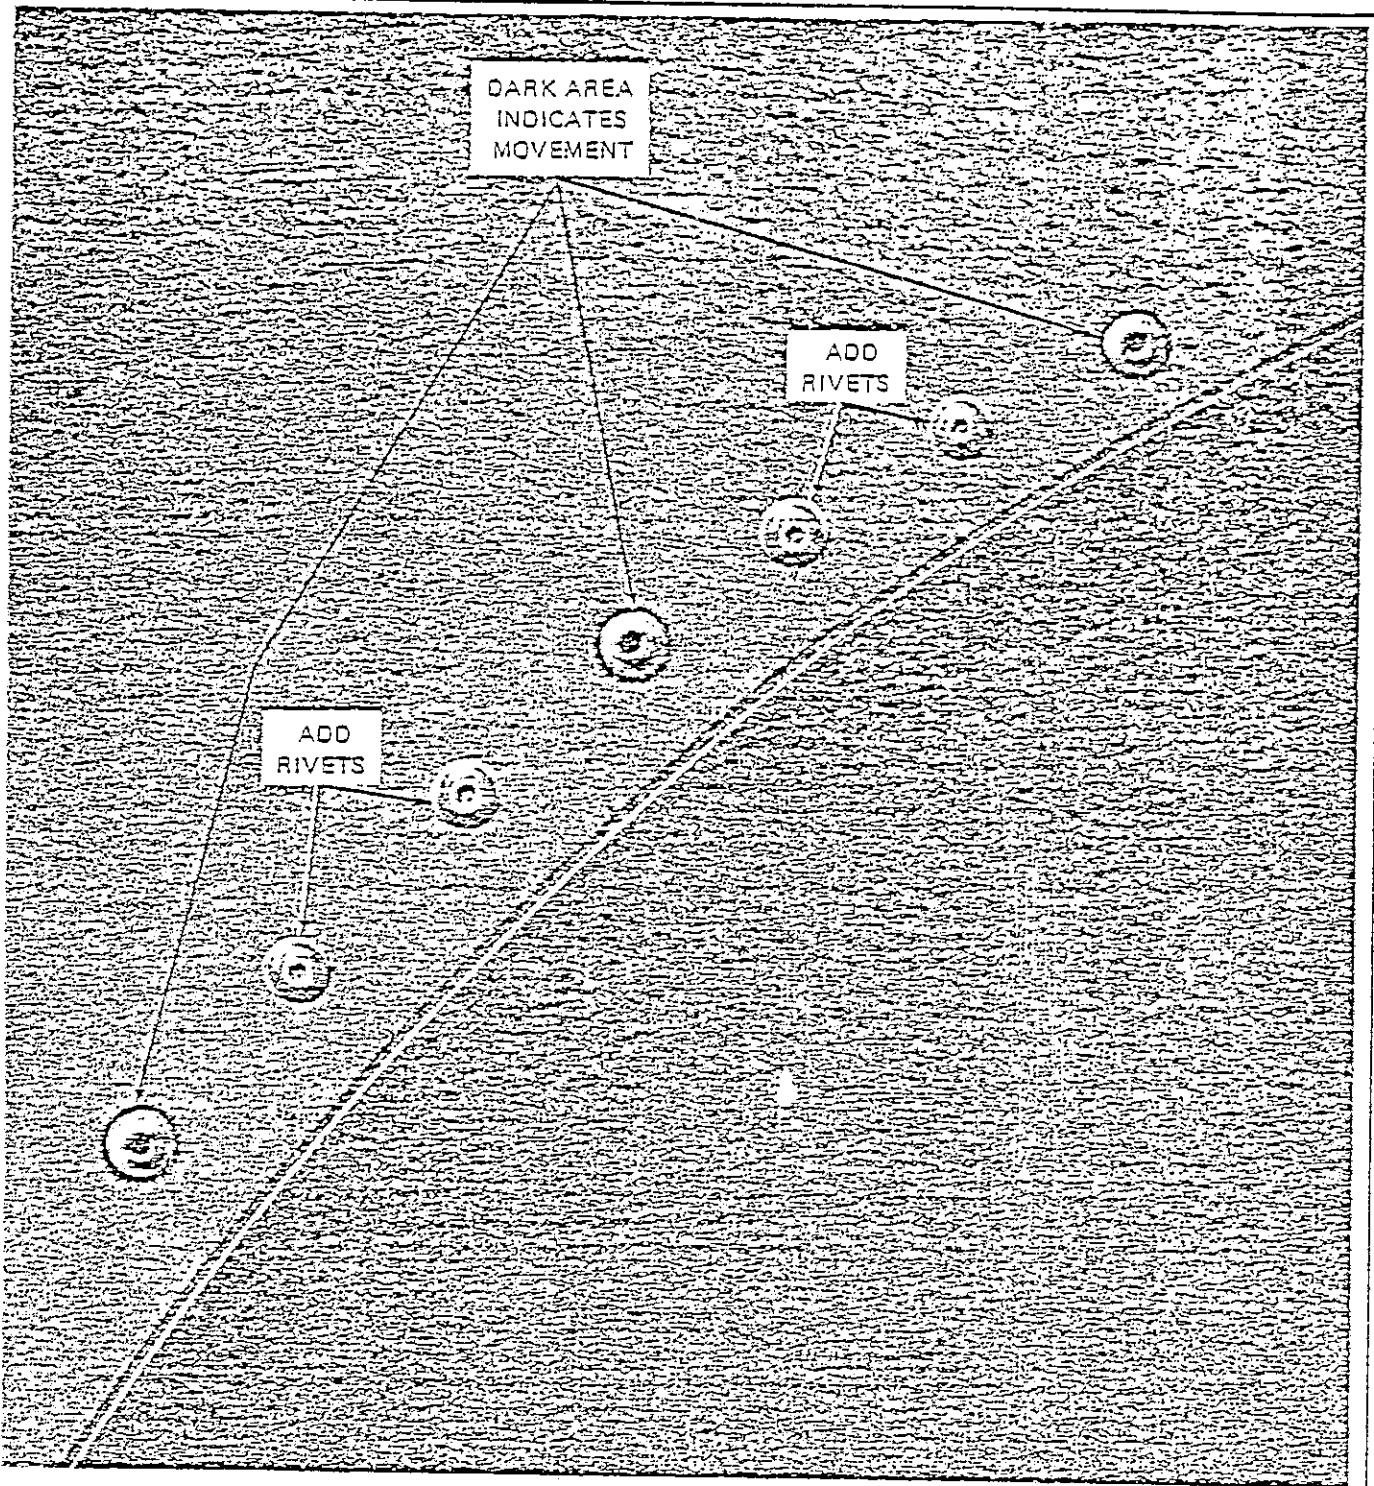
SHEAR PANEL TO WHEEL WELL CONNECTION.
